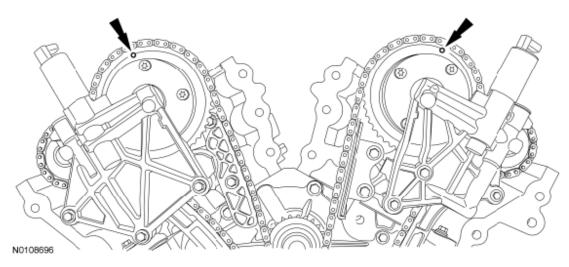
Aligning Timing Marks On VCT Assemblies Courtesy of FORD MOTOR CO.
